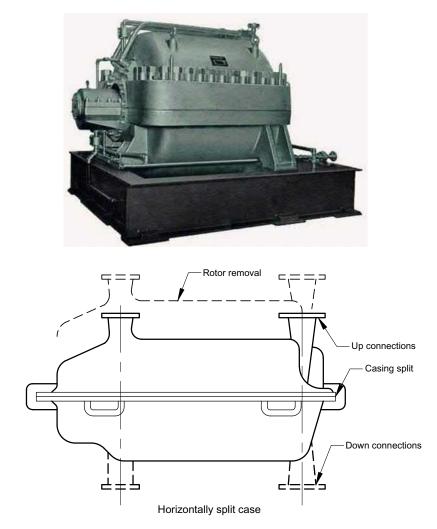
Horizontally split centrifugal compressor. *Top*: Assembled; *Bottom*: Joint Construction.
